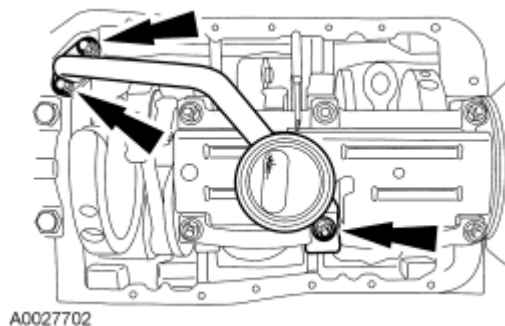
Locating Oil Pump Screen Cover Bolts & Nuts
